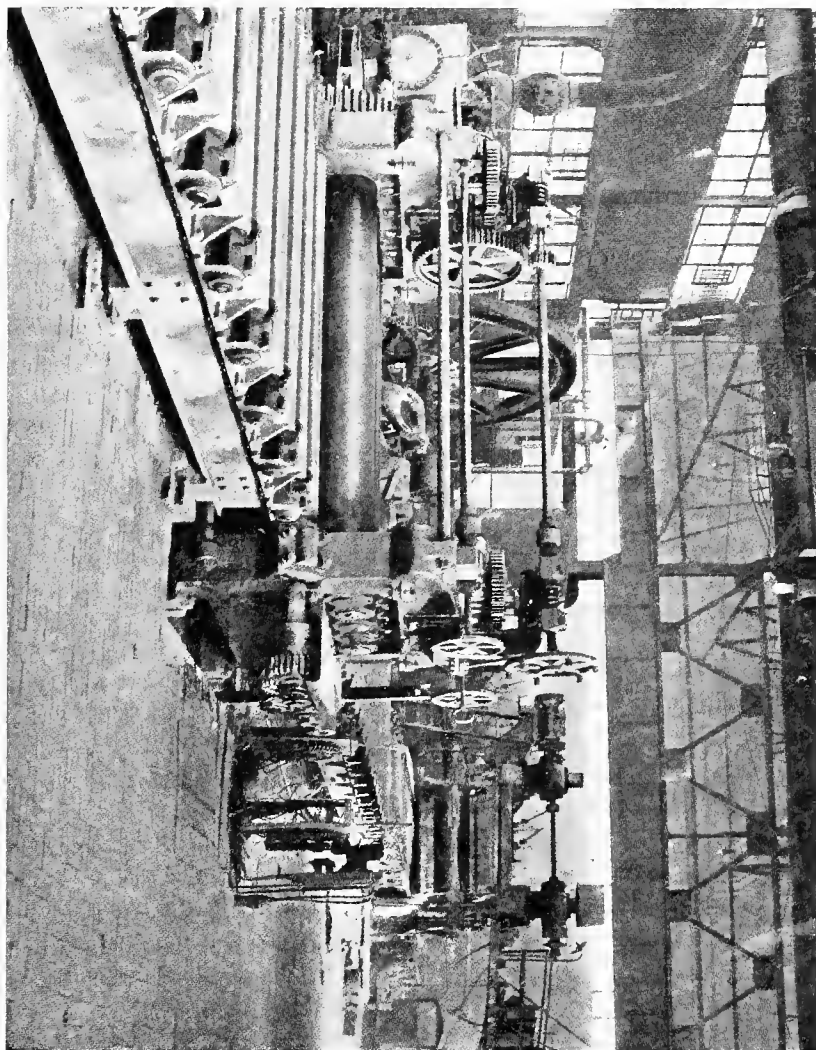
100-inch Plate Straightening Machine and 84-inch Plate Mill installed by The United Engineering and Foundry Company.
